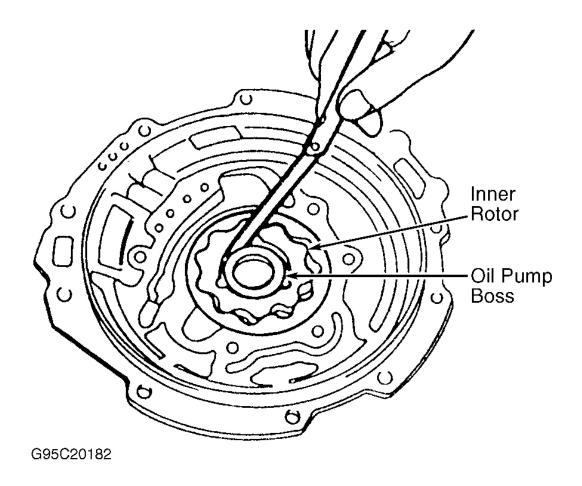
Measuring Rotor Side Clearance Courtesy of MAZDA MOTORS CORP.
